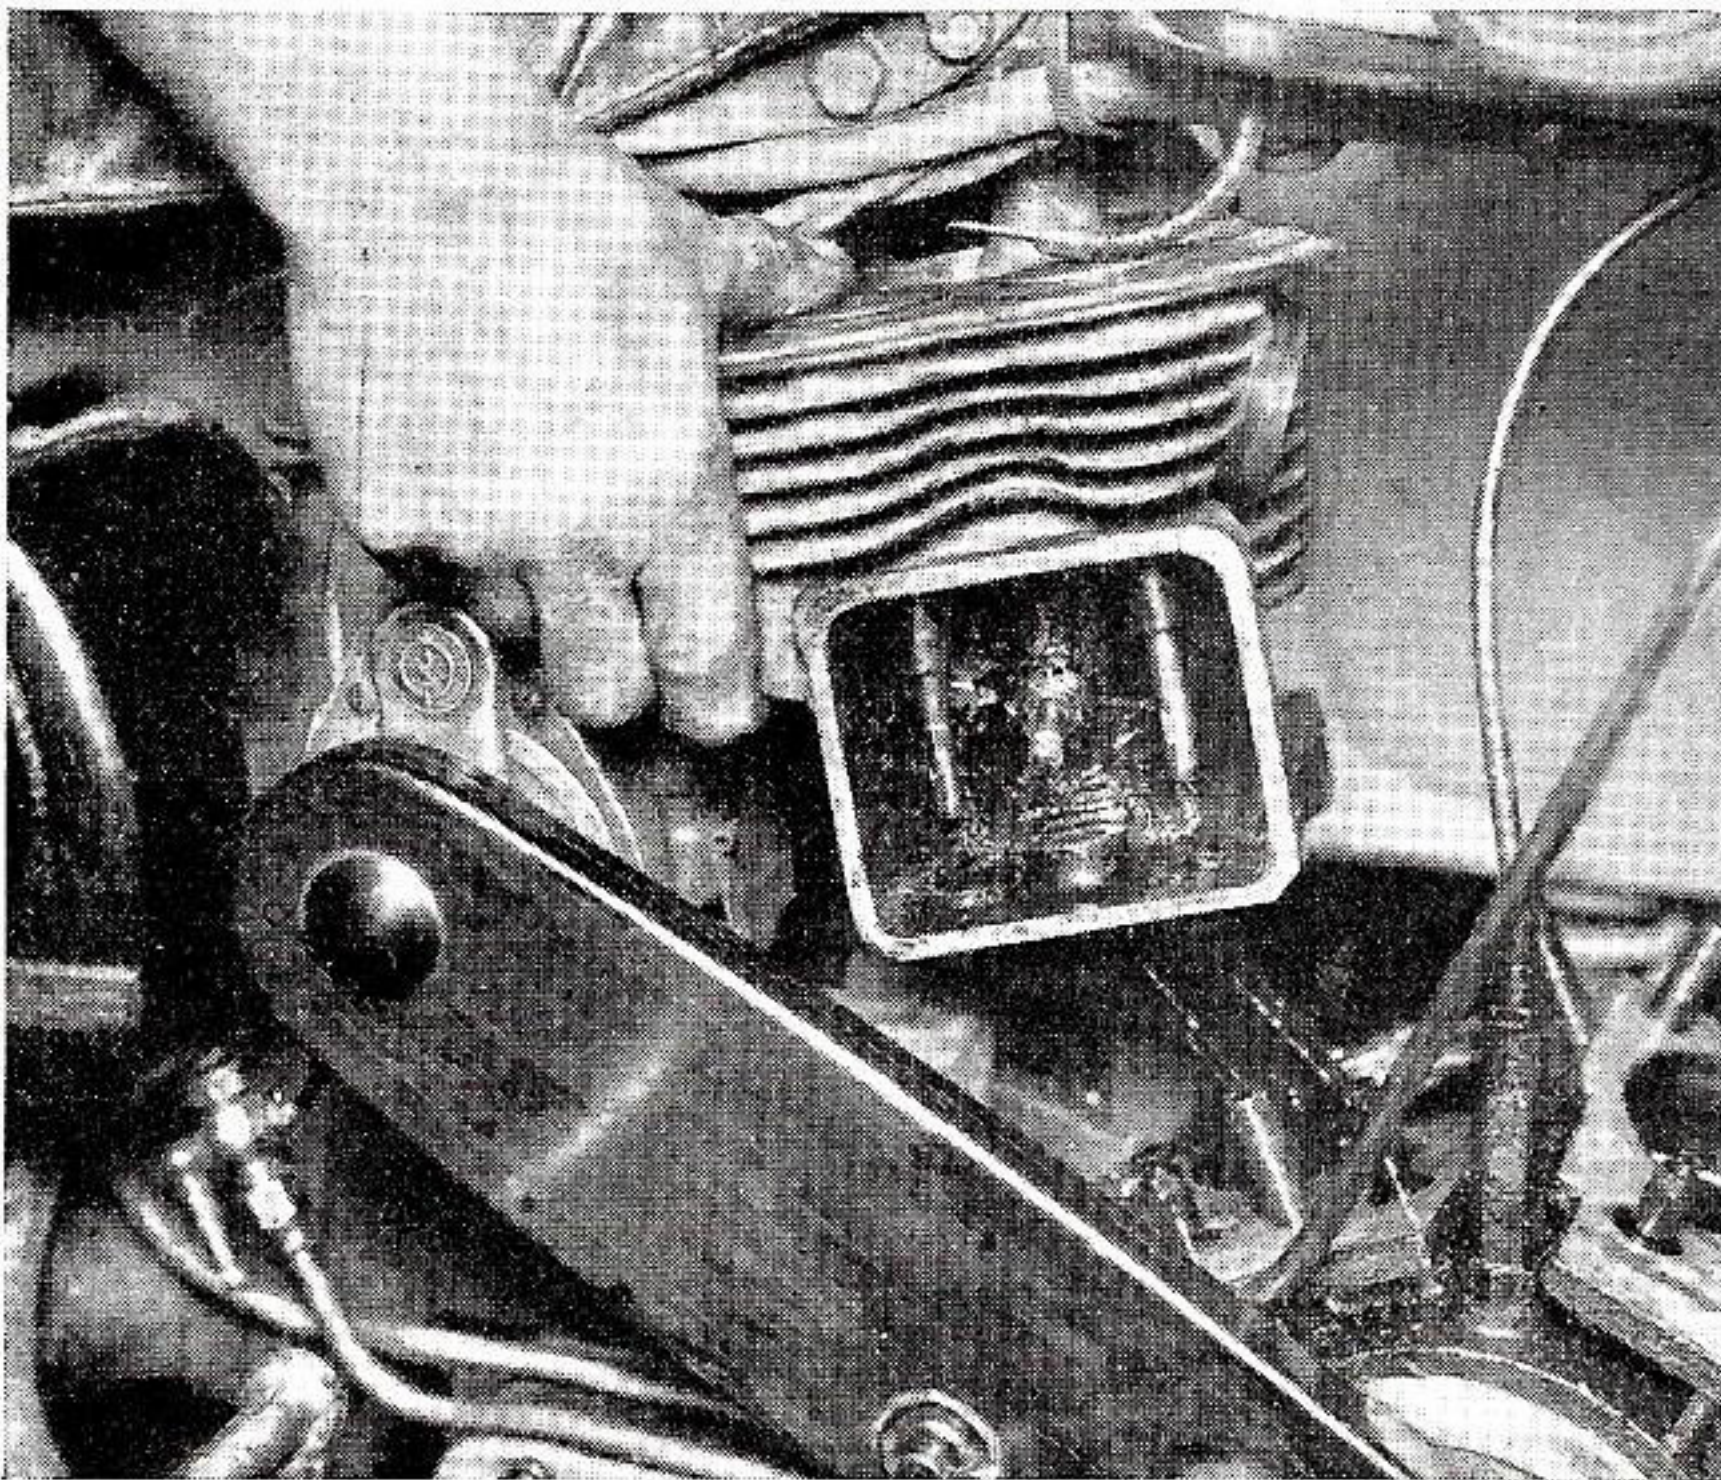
REMOVING S.V. CYLINDER HEAD.
